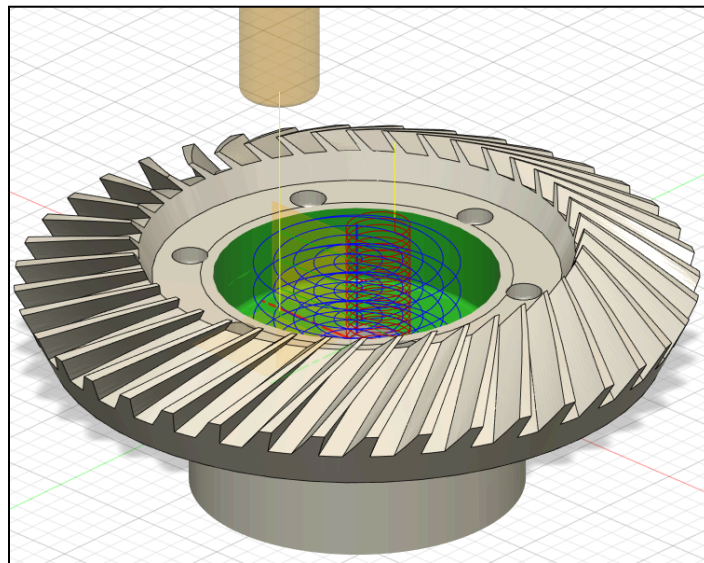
Adaptive clearing operation tool path generated in Fusion 360 for the large gear .
